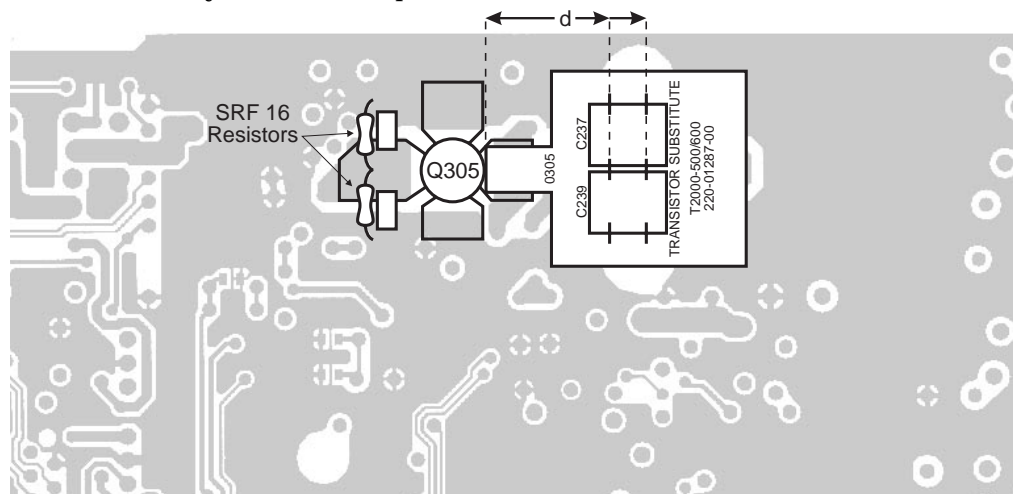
T2000-500/600 PA - Bottom Side
